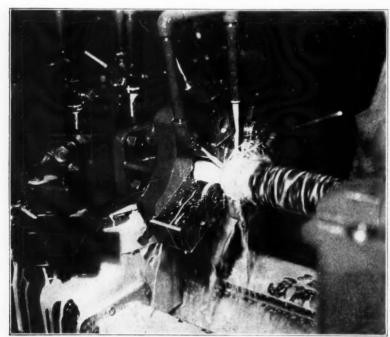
Milling vernier jaws in a plain milling machine using a special formed cutter.
